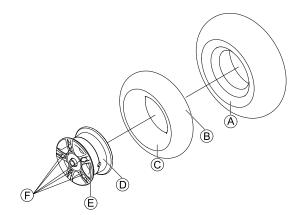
Example of Storm⁴ MAX castor wheel. Valve and valve cap ® are not shown in illustration.
